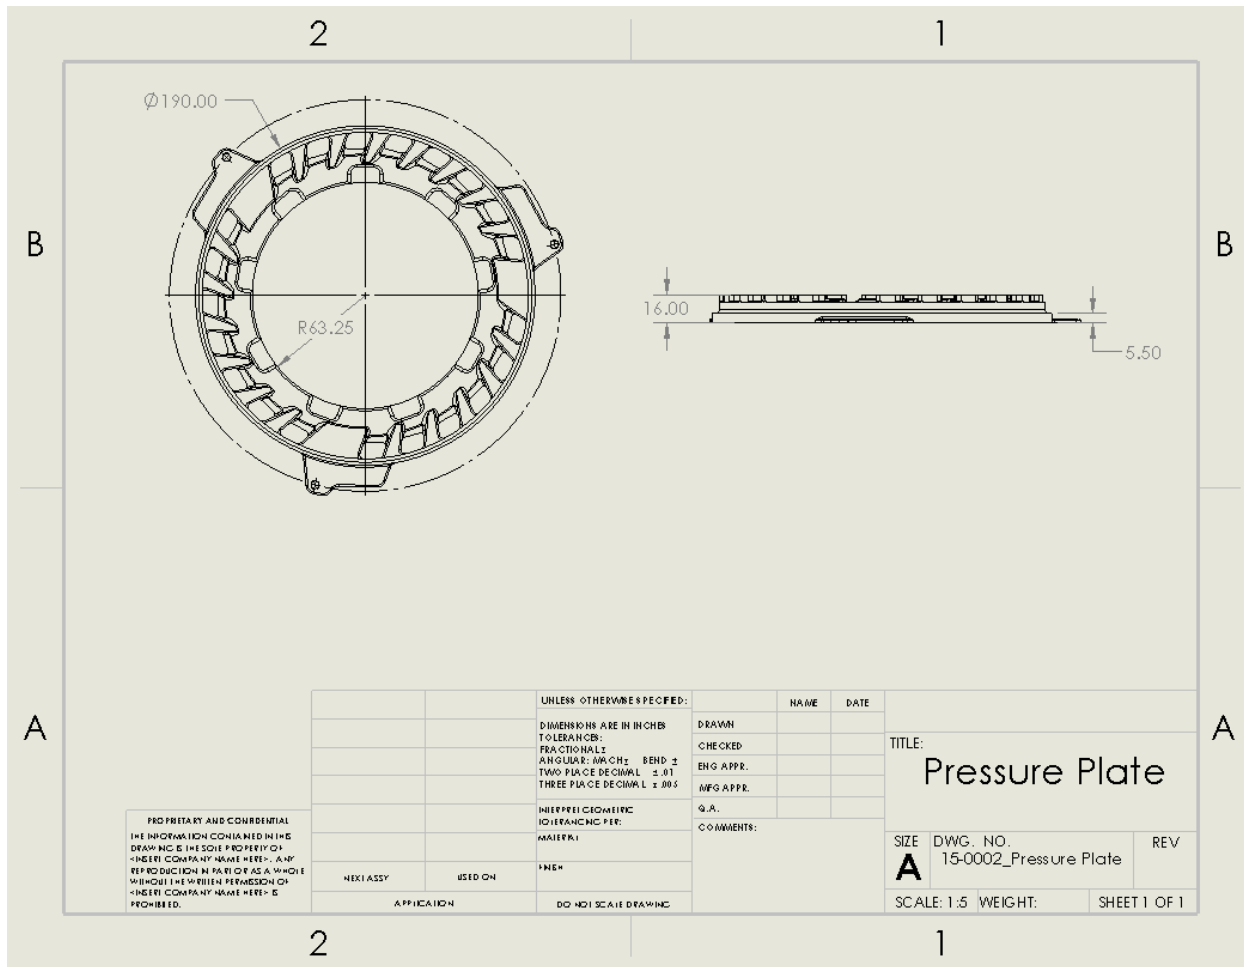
This is the drawing and some dimensions related to the pressure plate. This was the 2nd part made in order to make the clutch assembly. The part was made following the demo in the following video from about [9:00 to 30:00 min]: <https://youtu.be/azITzOcZ6-g>
